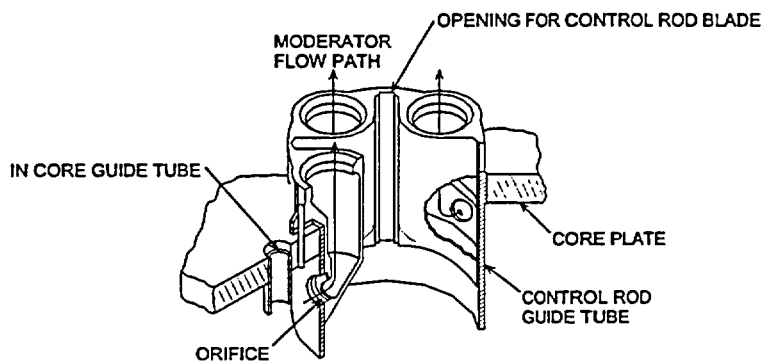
Control Rod Guide Tube To Control Rod Drive Housing Attachment
